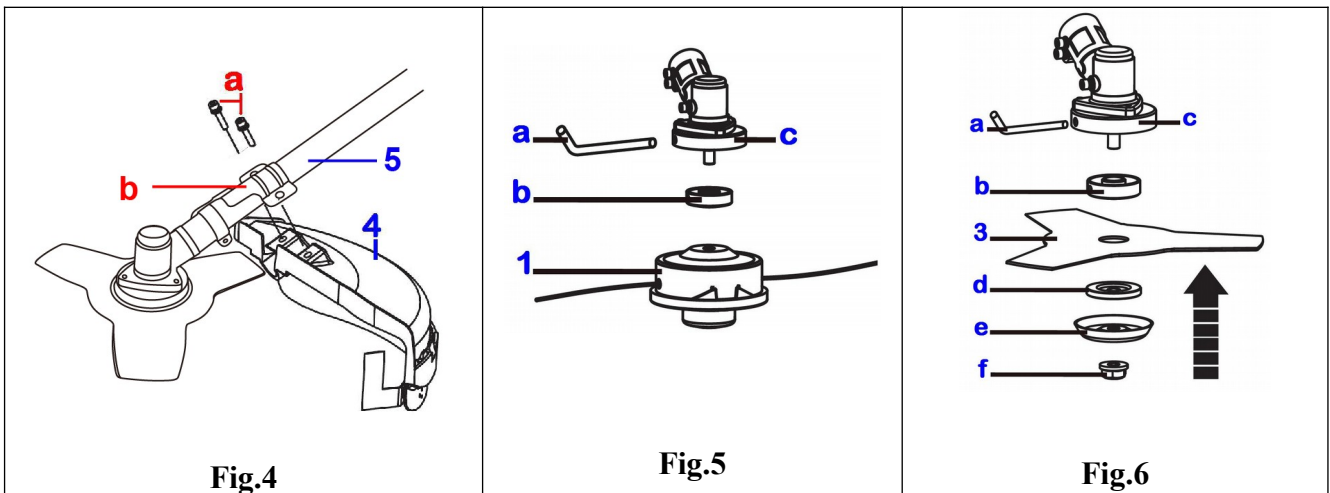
a- Key; b-collar ring; c- gear case; 1- nylon spool
